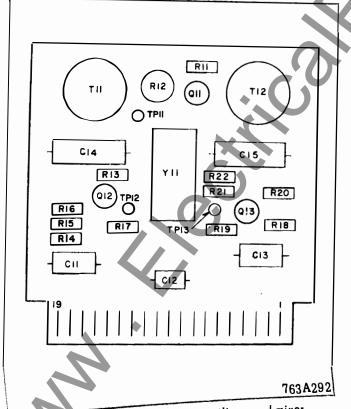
Component locations on oscillator and mixer printed circuit board.
